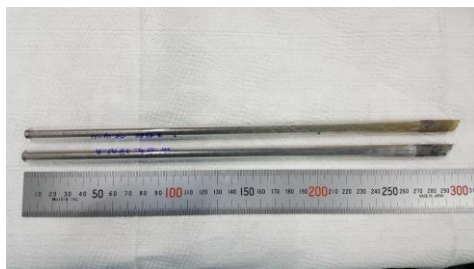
Metallic fuel slugs fabricated using an injection casting method.
